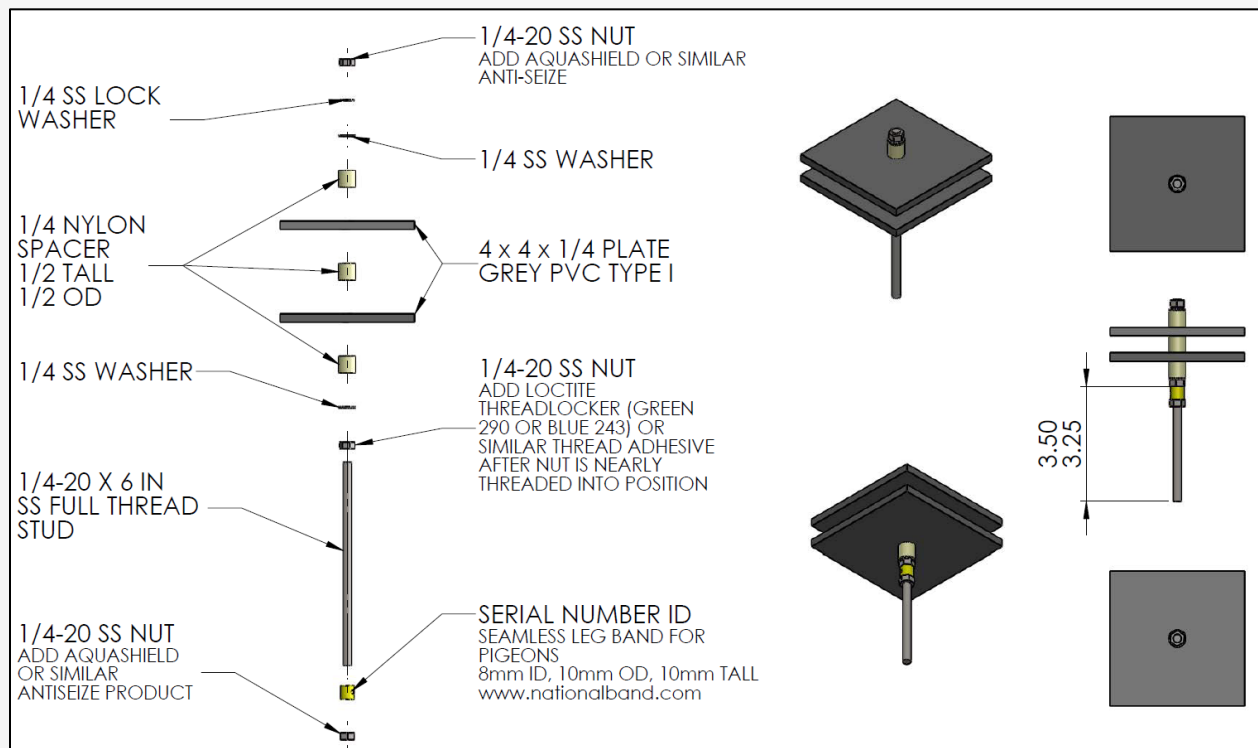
CAU design and assembly instructions. Units are in inches unless otherwise specified.
